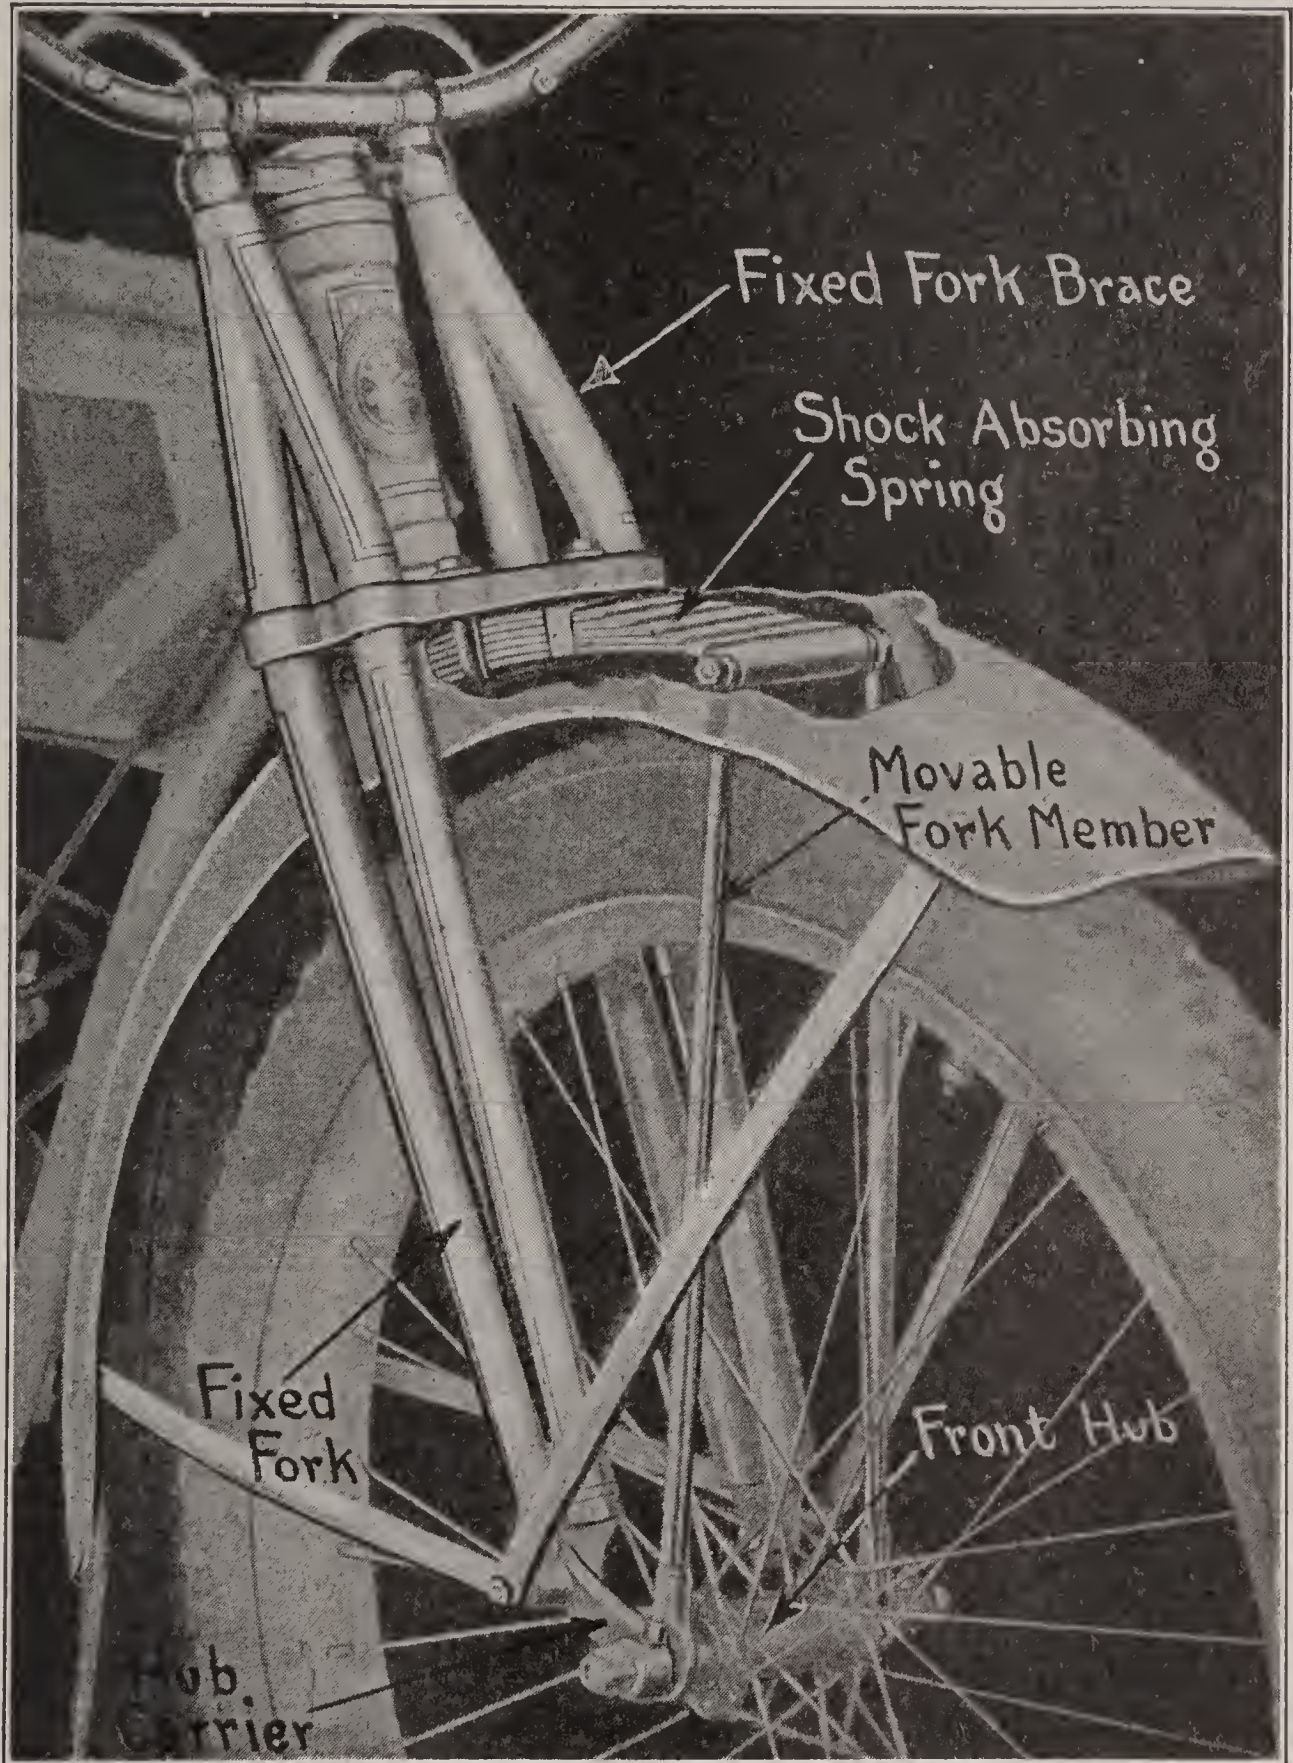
Leaf Spring Used on the Eagle Motorcycle to Control Movable Fork Member.
